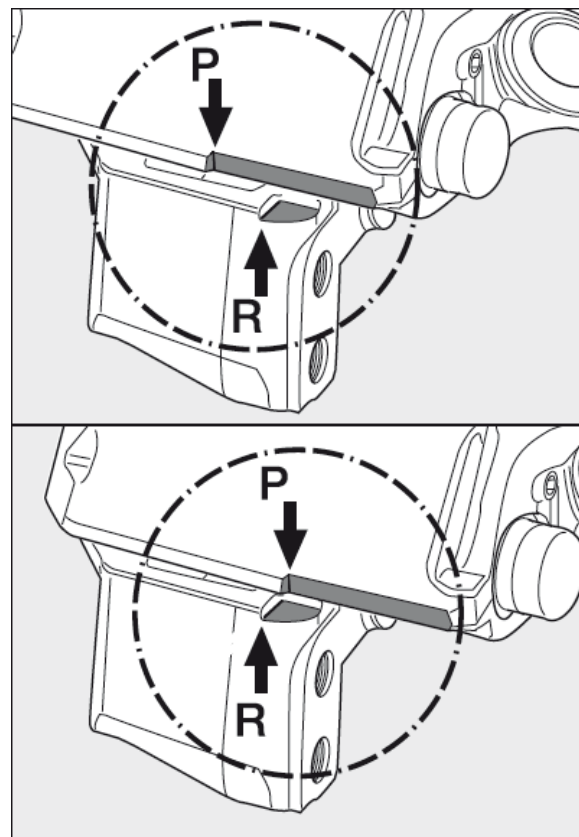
PAD WEAR CHECK FRONT AND TAG AXLE
